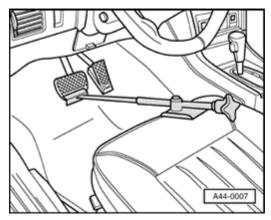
Inserting Brake Pedal Depressor V.A.G 1869/2 Courtesy of VOLKSWAGEN UNITED STATES, INC.
